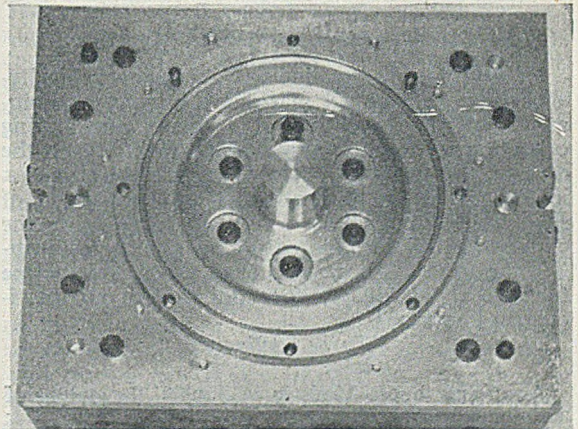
Patternplate 18 by 22 in. for a 12-in. dia. Wire-rope Sheave.
